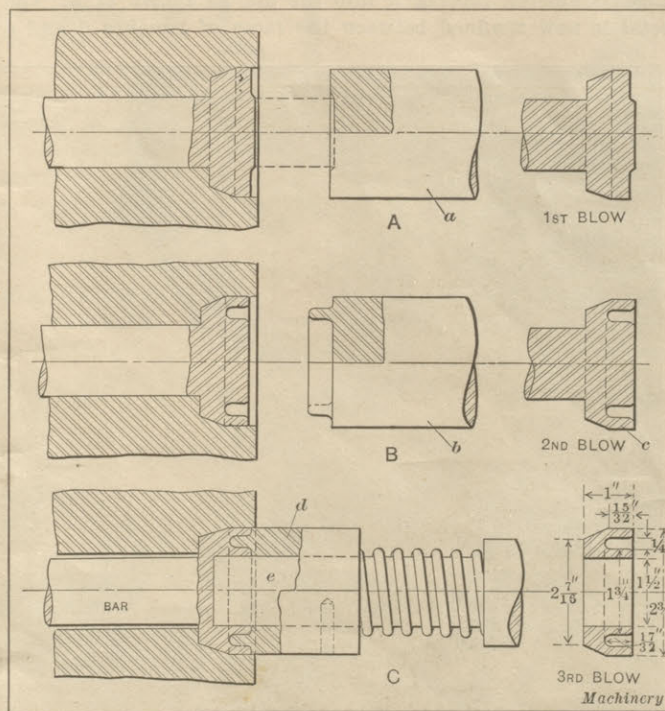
Diagram illustrating Method of producing Shrapnel Shell Heads in a Power Forging Machine without any Waste of Stock
